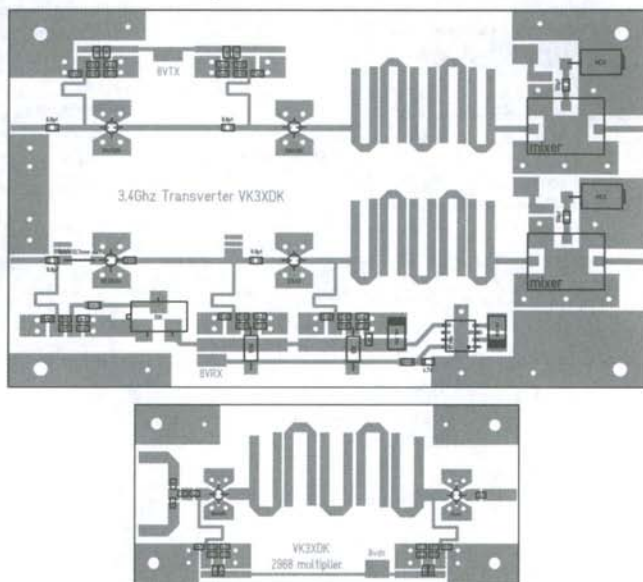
PCB layouts 3.4 GHz transverter and multiplier
